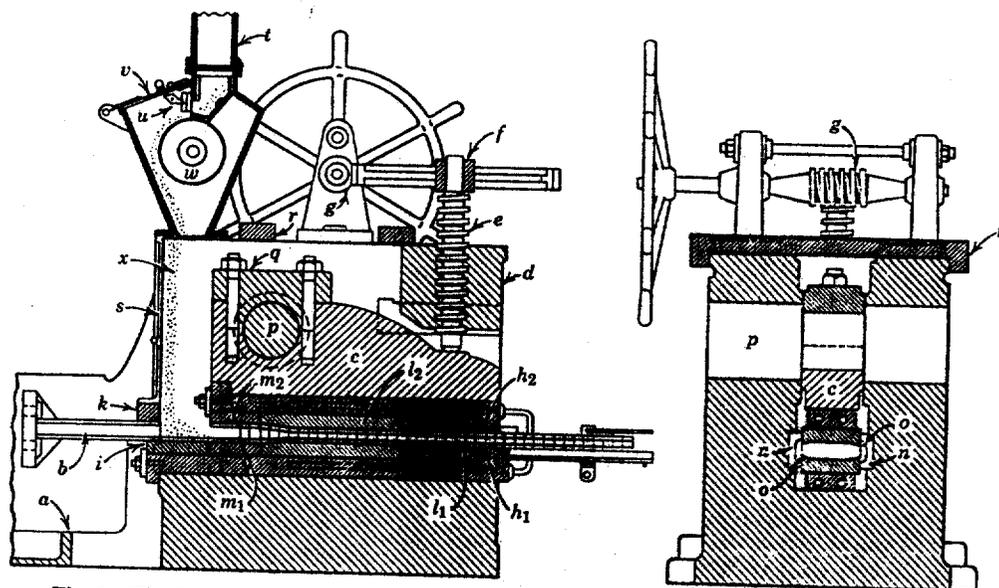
The Exter press. Press block, press feed, etc. of an old type single press. *a.* Press frame; *b.* stamp; *c.* tongue; *d.* press block part with spindle female thread; *e.* tongue-adjusting spindle; *f.* gear wheel; *g.* worm drive; *h₁* and *h₂*, form books; *i* and *k.* lower and upper guide pieces; *l₁* and *l₂*, lower and upper long molds; *m₁* and *m₂*, working pieces; *n.* side wedges; *o.* packing strips; *p.* tongue belt; *q.* bolt cover; *r.* ties; *s.* door; *t.* feed pipe; *u.* damper; *v.* cleaning door; *w.* feed roll; *x.* coal inlet shaft.
